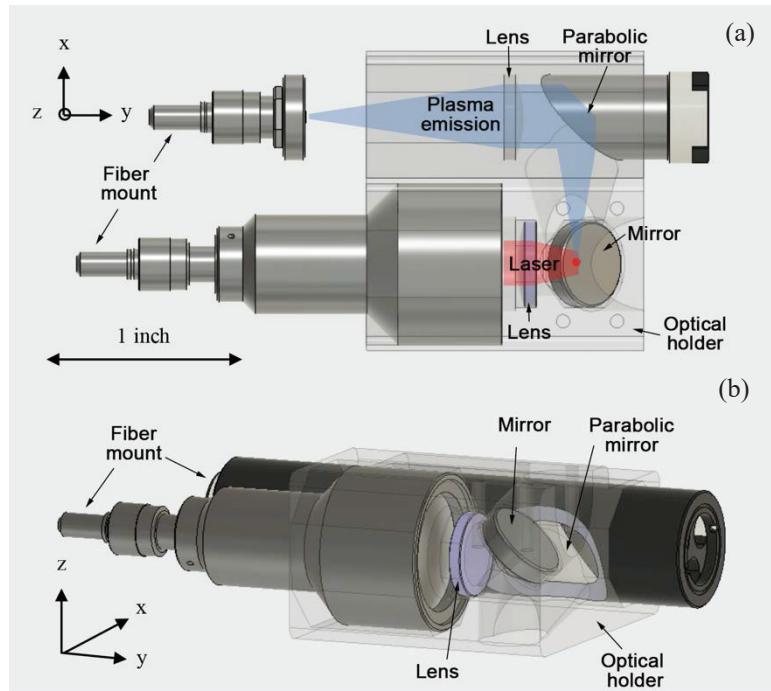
Remote optics assembly of robotic delivery car: (a) top view; (b) 3D view.
